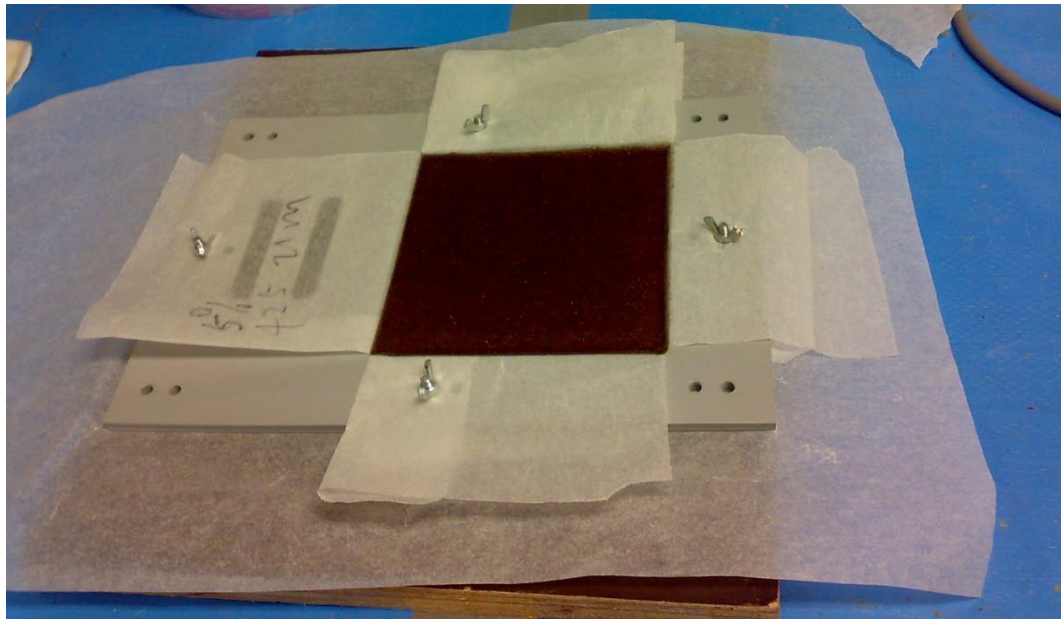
The mould used for casting the samples for loss tangent measurement
